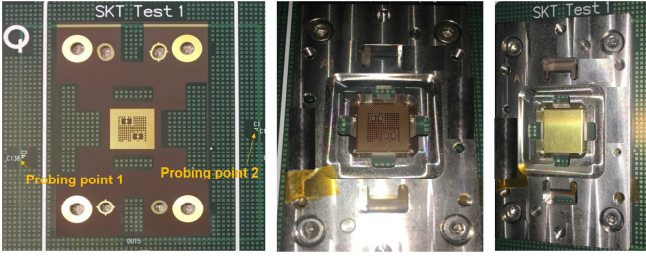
Fixture design. left: top view of fixture design with two probing points located at edge of the fixture. middle: PCB fixture with socket mounted on top. right: PCB fixture with socket mounted on top and shorting plate is added on top of socket to make a short.
